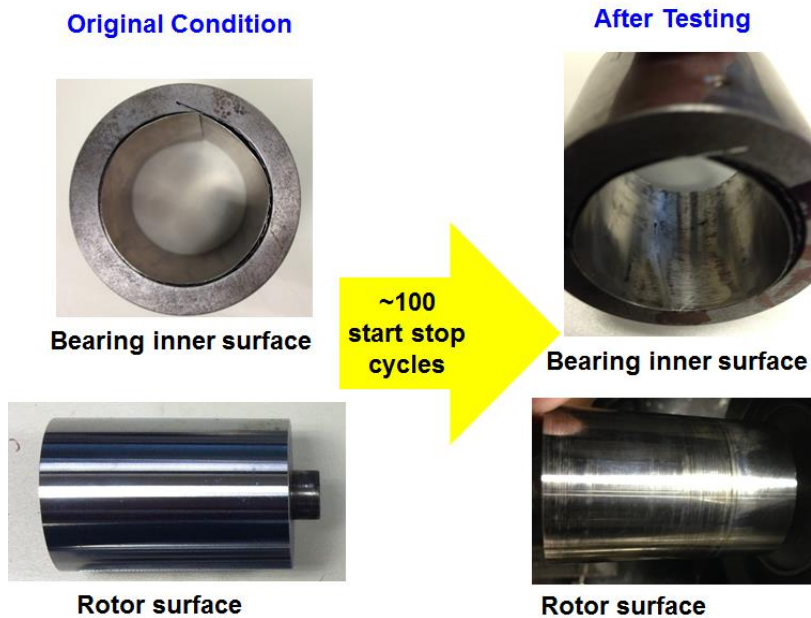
Photographs of the bearing and rotor inner surfaces before and after ~100 cycles of rotor start and stop
